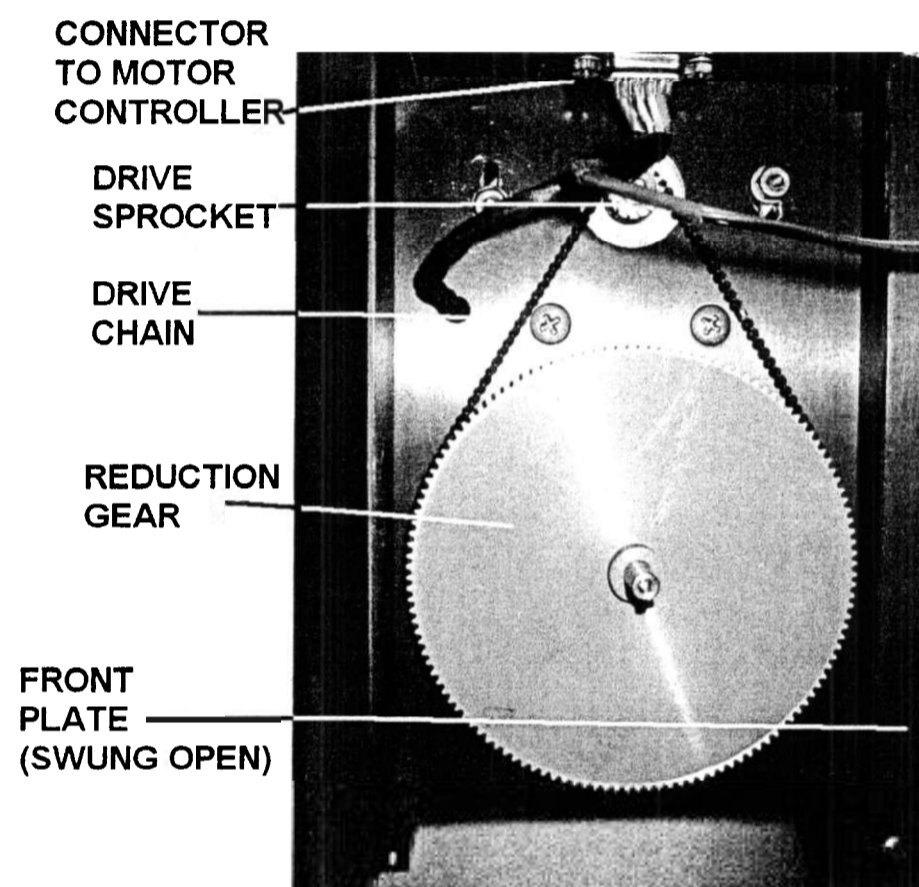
Interior View of Assembled Stepper Motor Reduction Gear Housing.
